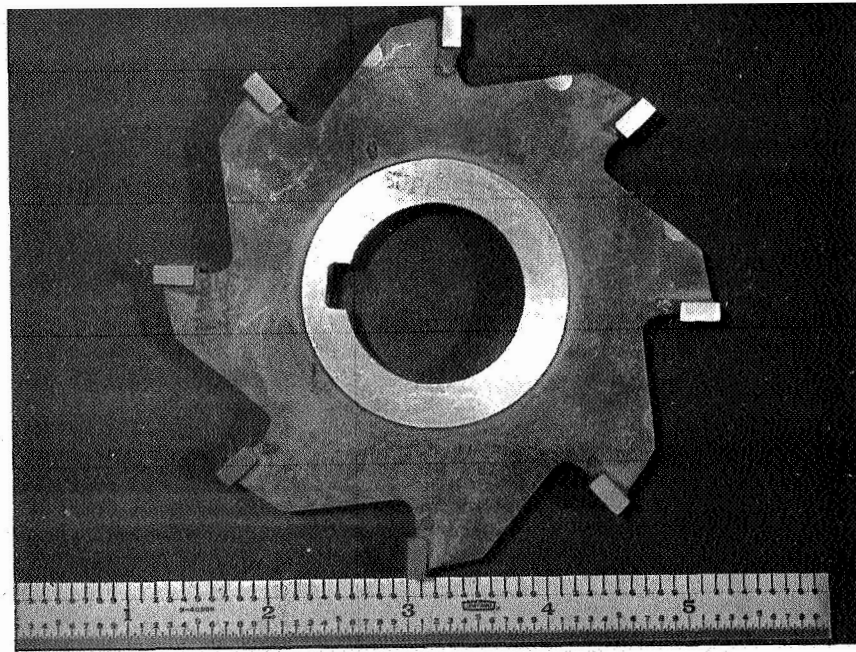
MILLING CUTTER WITH NEGATIVE RADIAL RAKE
